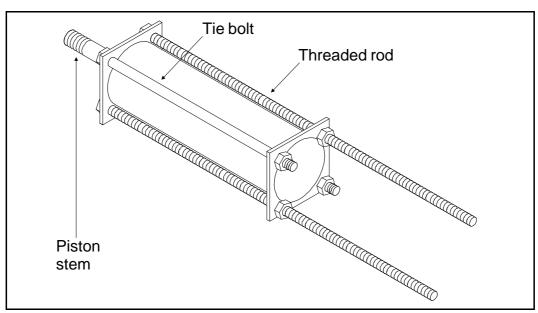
(MSSM0130AE) Using Threaded Rods
